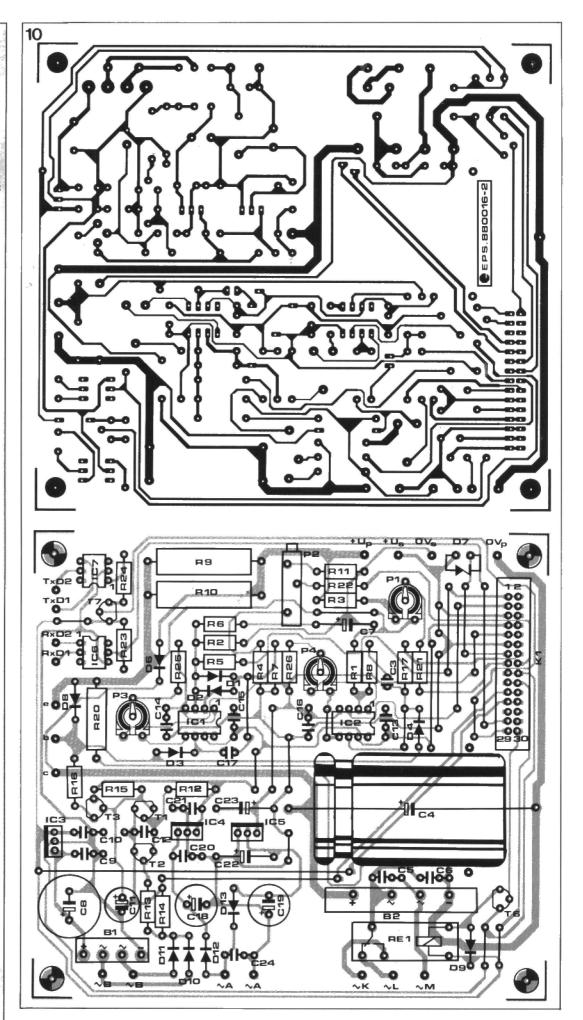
Track layout and component mounting plan of the single-sided control board in the power supply.
